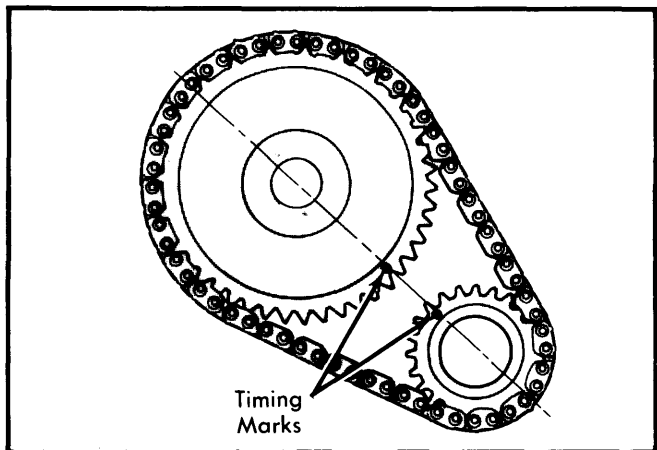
Timing Chain and Crankshaft Sprocket Alignment
